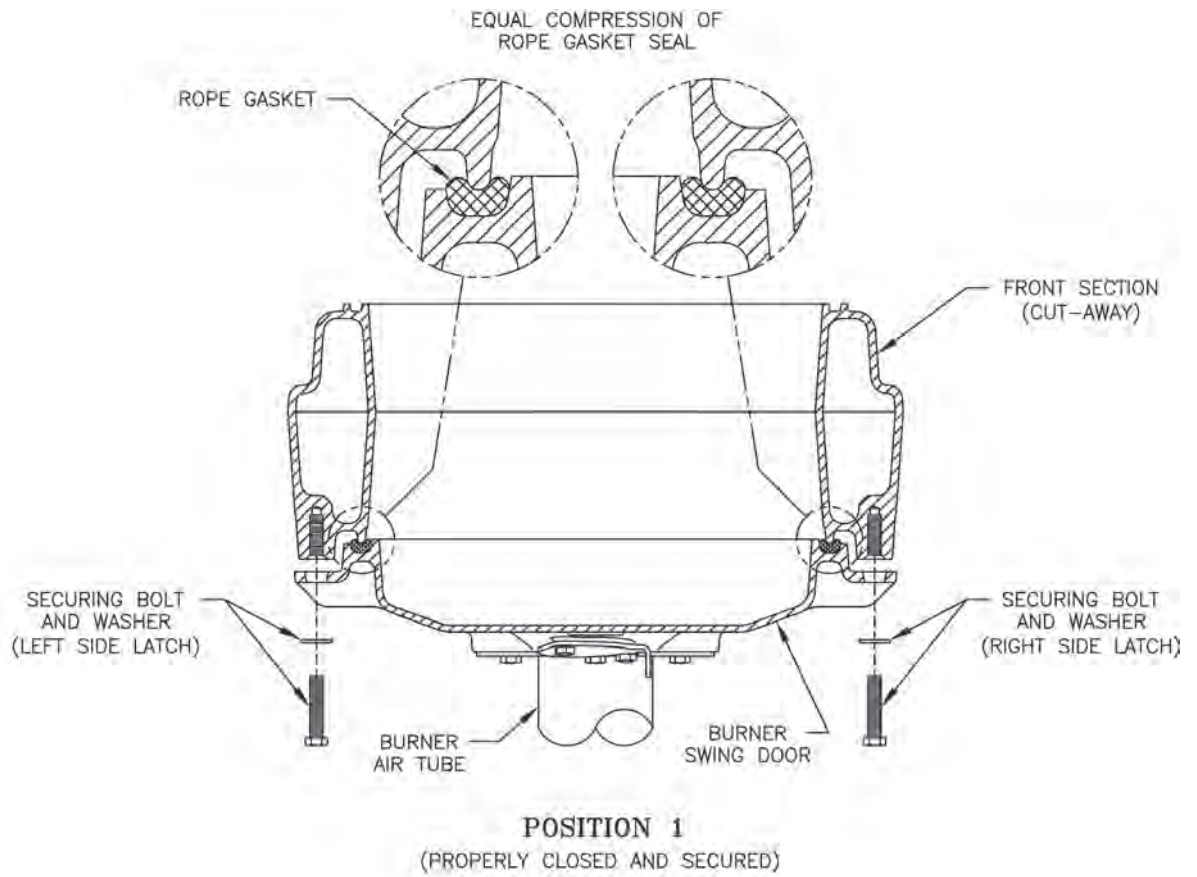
B: Top View - Burner Swing Door Mounted to Cast Iron Block Assembly (Jacket Removed for Clarity)
